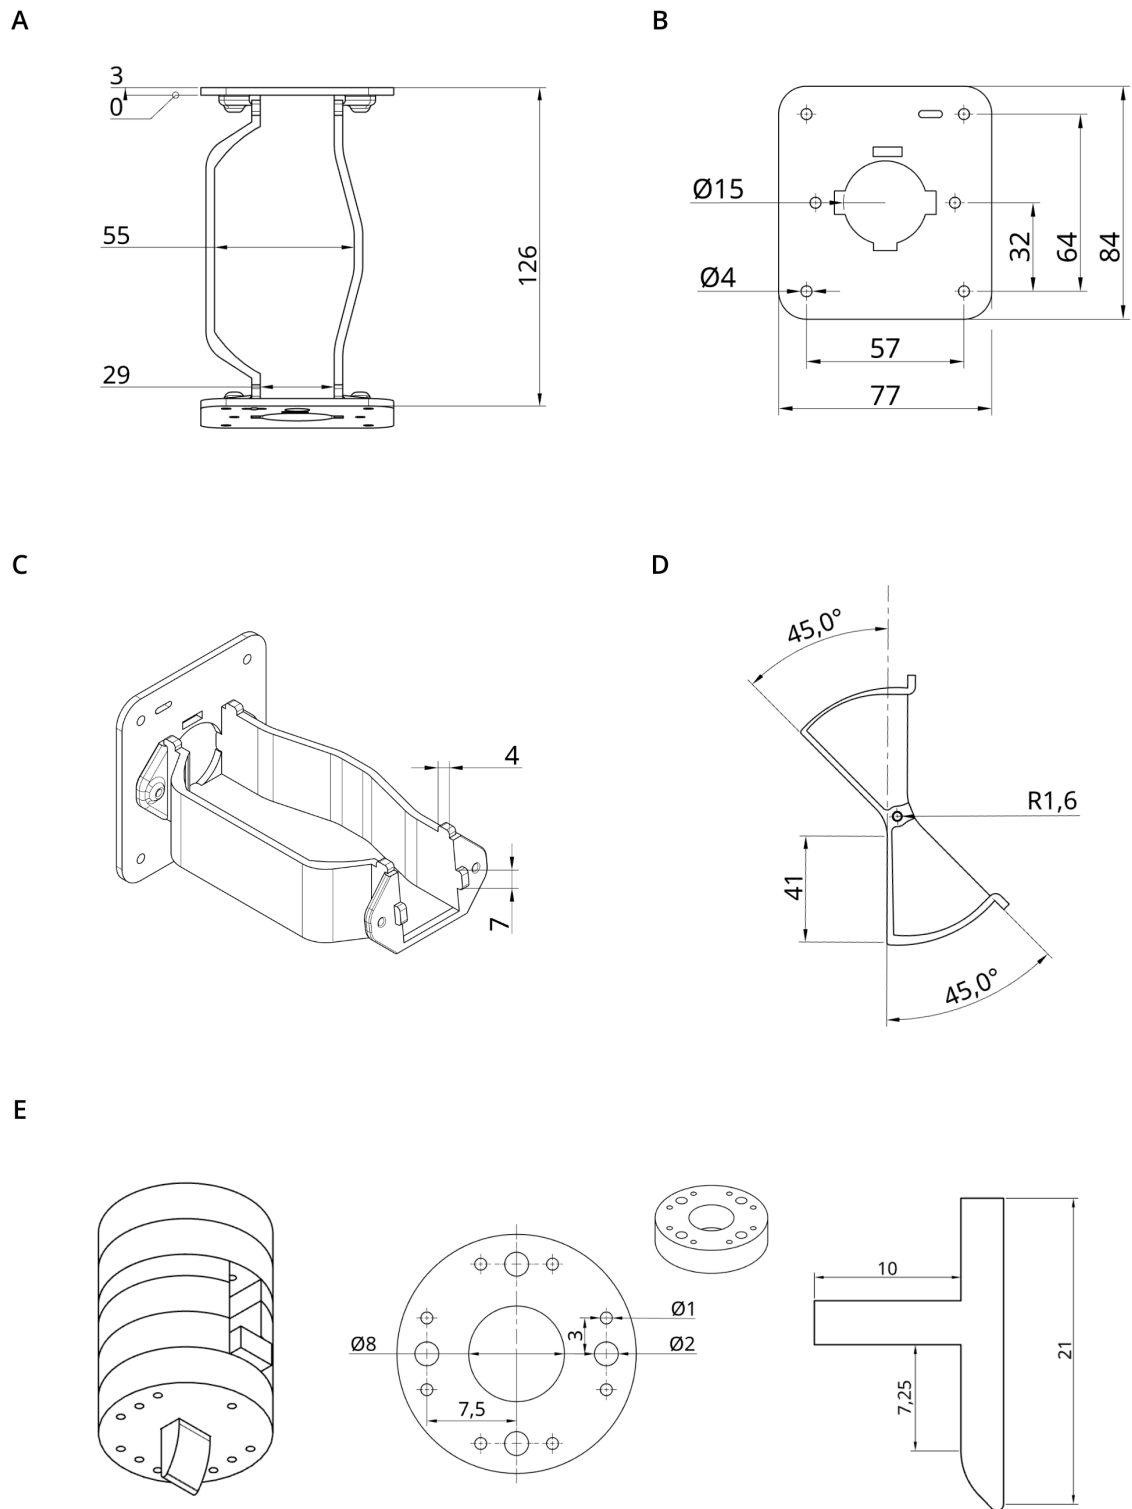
Technical drawing of the door mechanism components - Version 1.1. A – Top view of the base. B – Front view of a support piece. C – Isometric view of the base and a support piece with connector piece dimensions. D – Top view of the door. E – Stopper piece used in the door mechanism; the holes were designed to fit into the servo motor adapter. All dimensions are in millimetres and drawn to scale.
